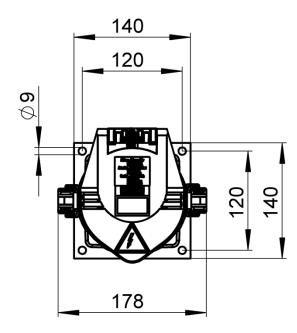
Dimensions Female Connector Panel FCP D-Line, C-Line (160A – 250 A) in mm
